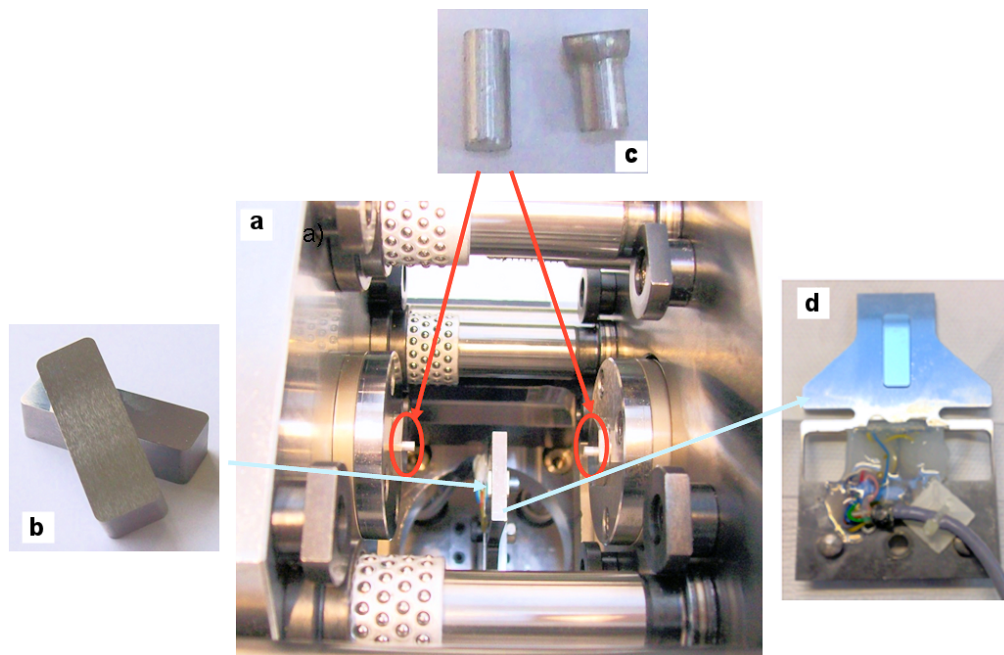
a) Close view of the testing equipment; b) Center tools made of high performance cold work steel Vanadis 6; c) Cylindrical test workpiece before and after the test; d) Friction force transducer [21].
